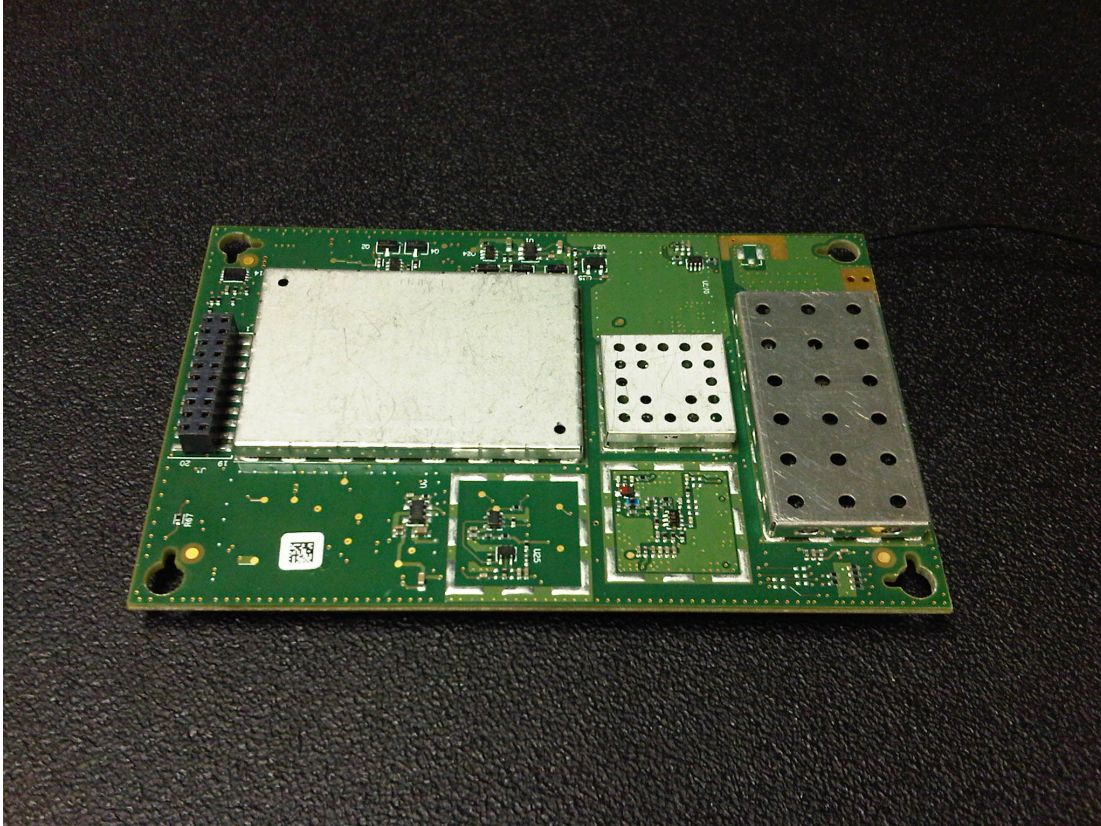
and Figures 3-2 show the assembly with no shield covers. Figures 3-2 and Figures 3-4 show shield covers on the core modem assembly while Figure 3-5 shows the bottom shield on antenna card.
